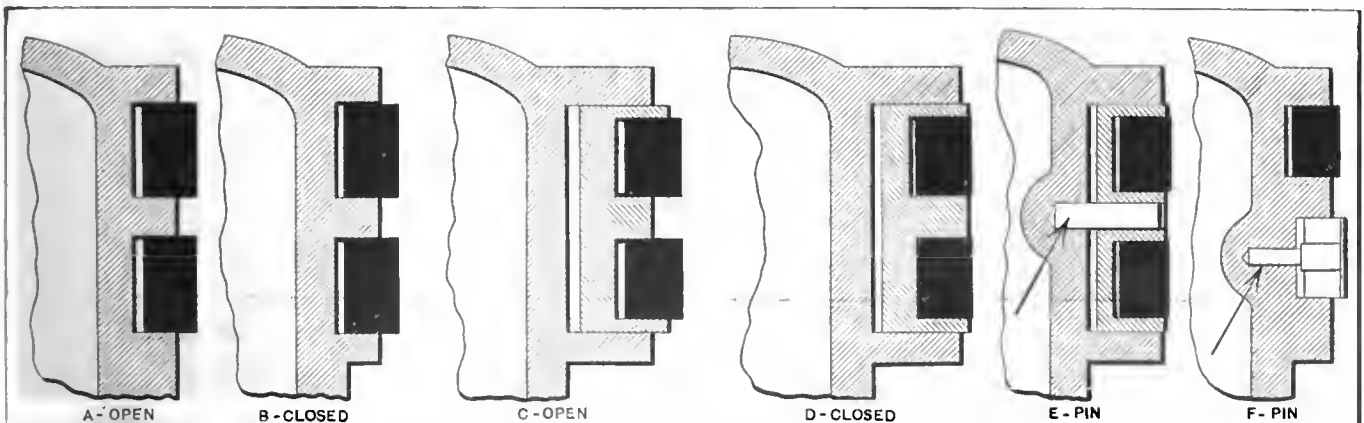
Sections of pistons showing clearance back of rings and means for fastening dowel pins in place
